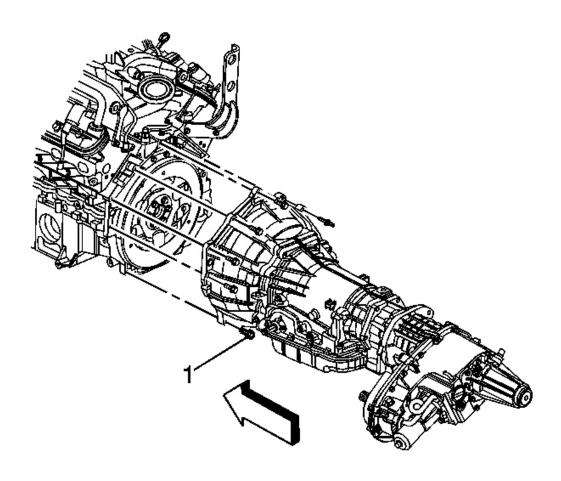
View Of Lower Bellhousing Bolts Courtesy of GENERAL MOTORS CORP.
